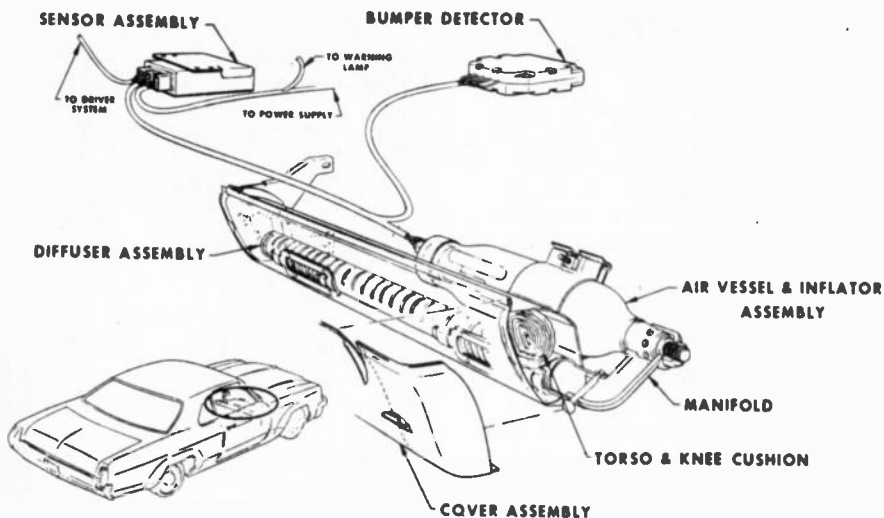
Accelerometers mounted in the bumper and on the fire wall are used to trigger the developmental air bag of GM.
